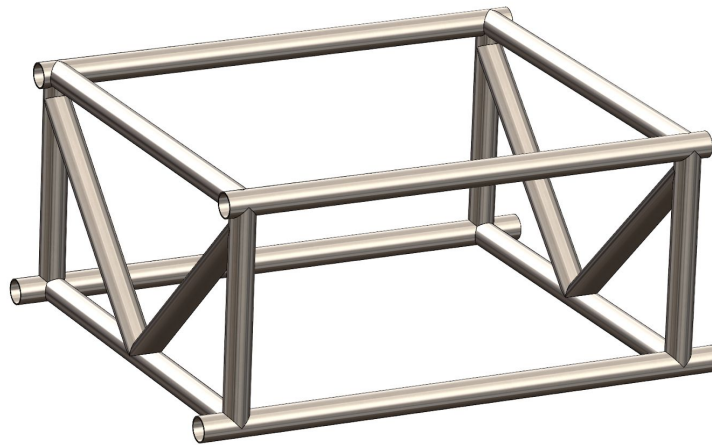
The CAD for the chassis is depicted above. Diagonal members provide torsional support. The chassis was made with space inside and holds up a rigid bottom plate to provide a place for the batteries and control components to remain protected yet close to the ground.
